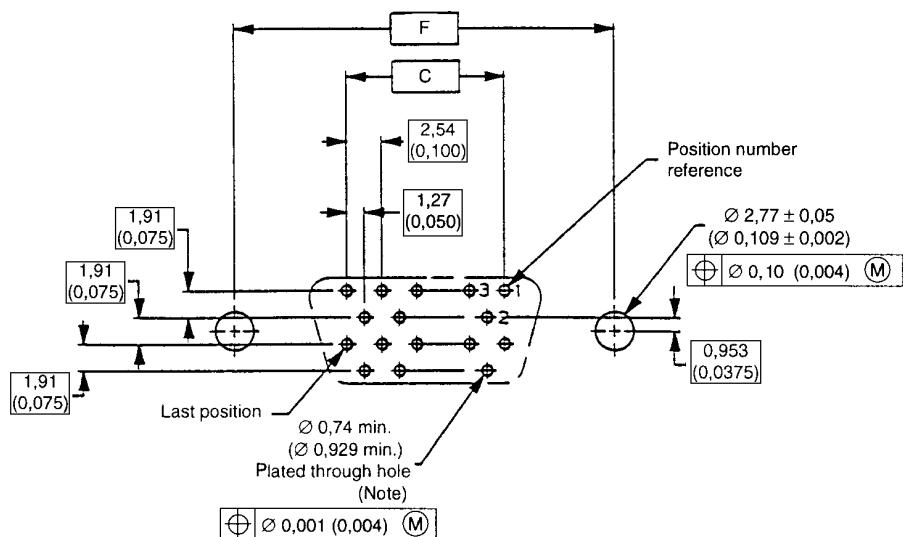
Detail for 10, 26, 38 and 50 positions, connector side of board
